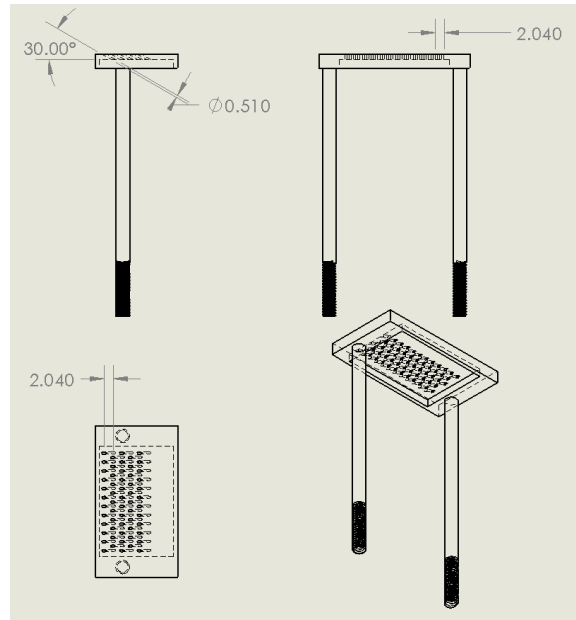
Five Row Cylindrical Hole Cooling Configuration
